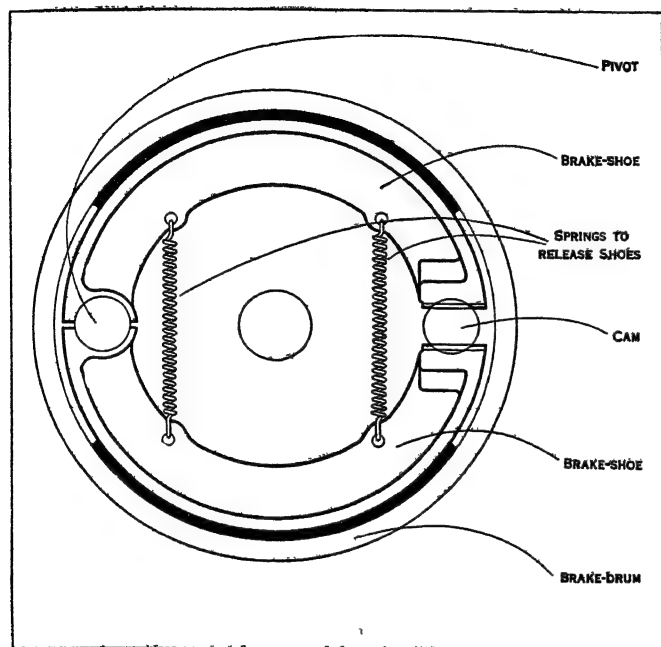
THE EXPANDING BAND BRAKE USED IN AUTOMOBILES
